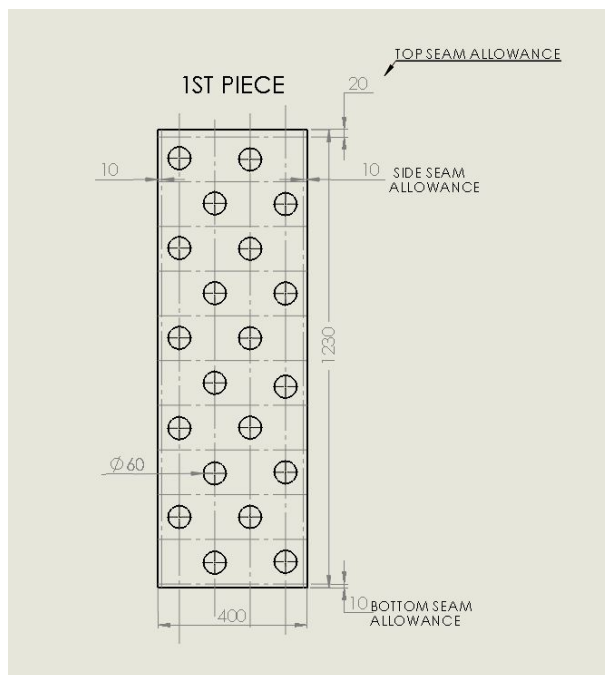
Manufacturing drawing of the 1st piece for the drogue.
